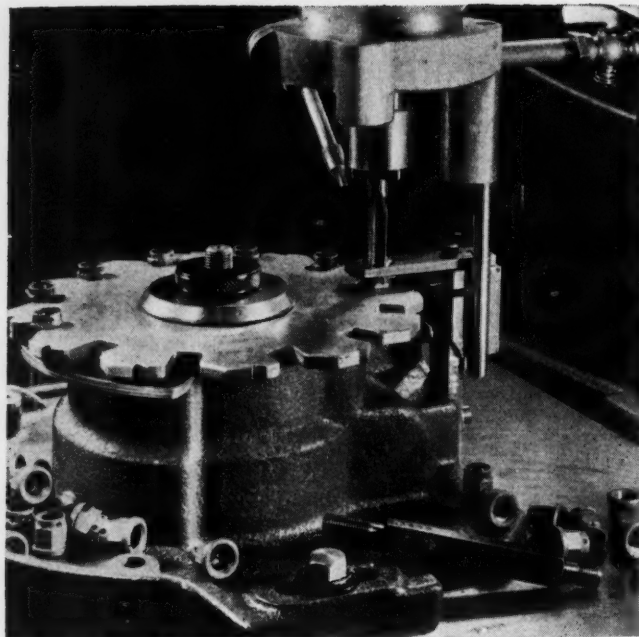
Automatic dial feeding fixture designed to hold steel aircraft nuts for tapping $\frac{1}{2}$ inch deep at a rate of 400 per hour.
